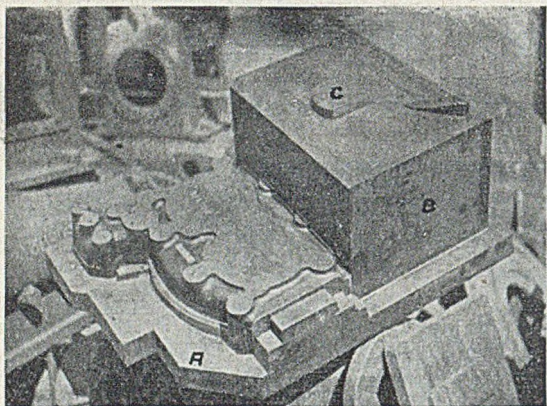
PATTERN EQUIPMENT FOR CYLINDER COVER SHOWING CORE PRINTS.
